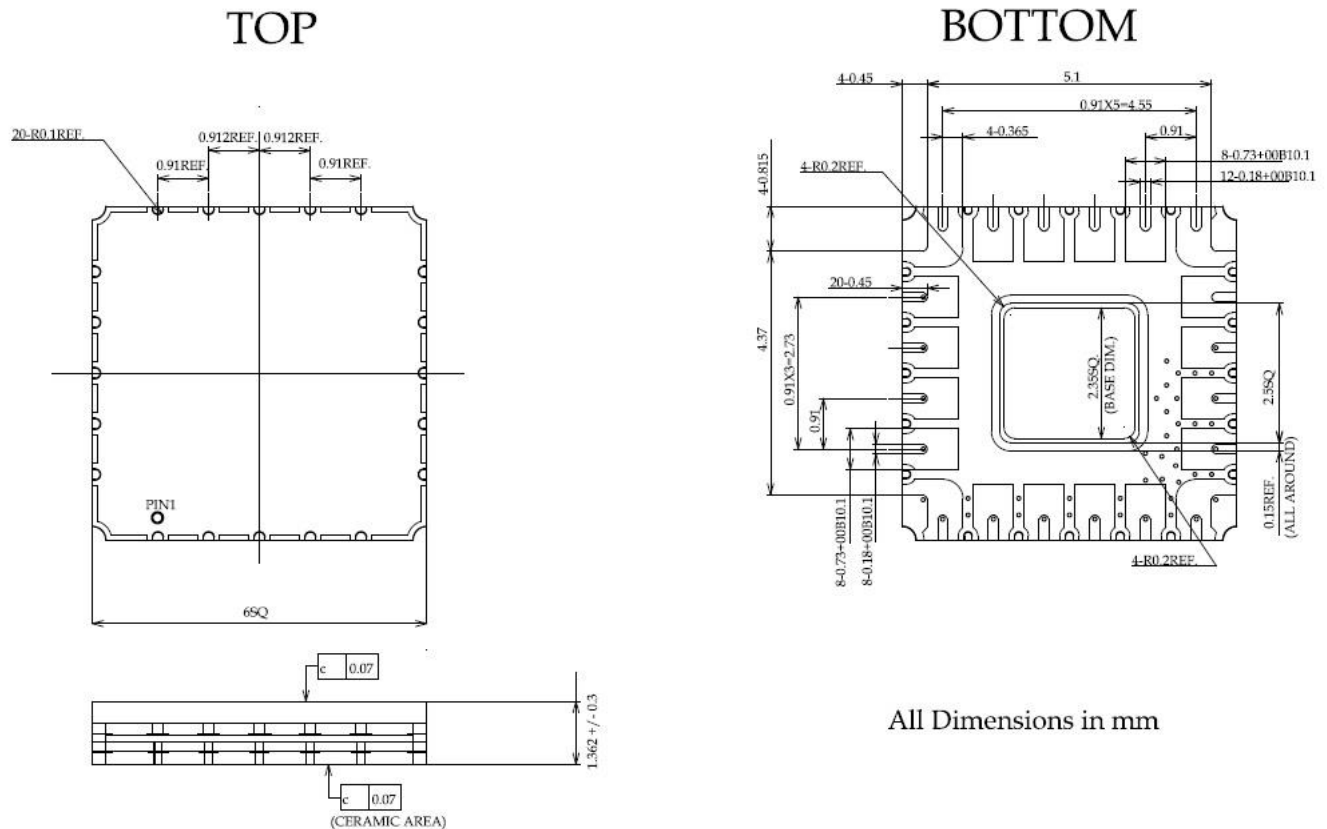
CQFN44 Package Drawing (All Dimensions in mm)
